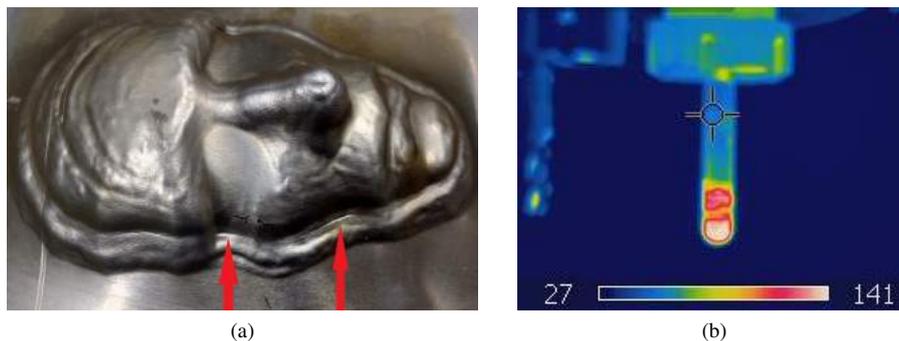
Test 1 (a) Shaped part (b) Tool after forming
